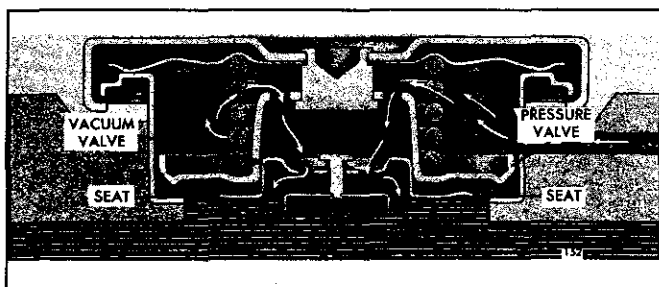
Pressure Control Cap (Vacuum Valve Open)
